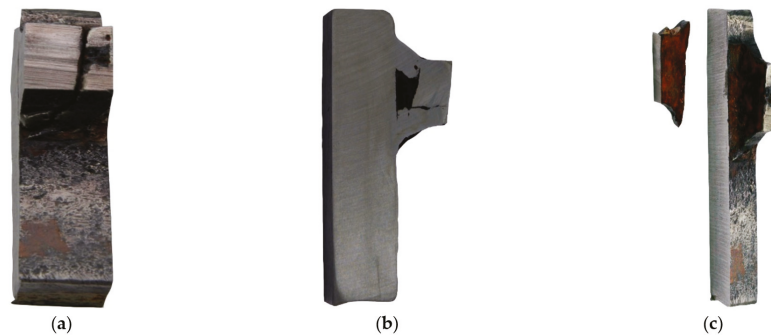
A macroscopic examination of crack 1 (handy-size bulk carrier 30206 DWT): (a) the bar cut from elements I and II, containing crack 1; (b) the joint between elements I and II and (c) the exit of crack 1.
